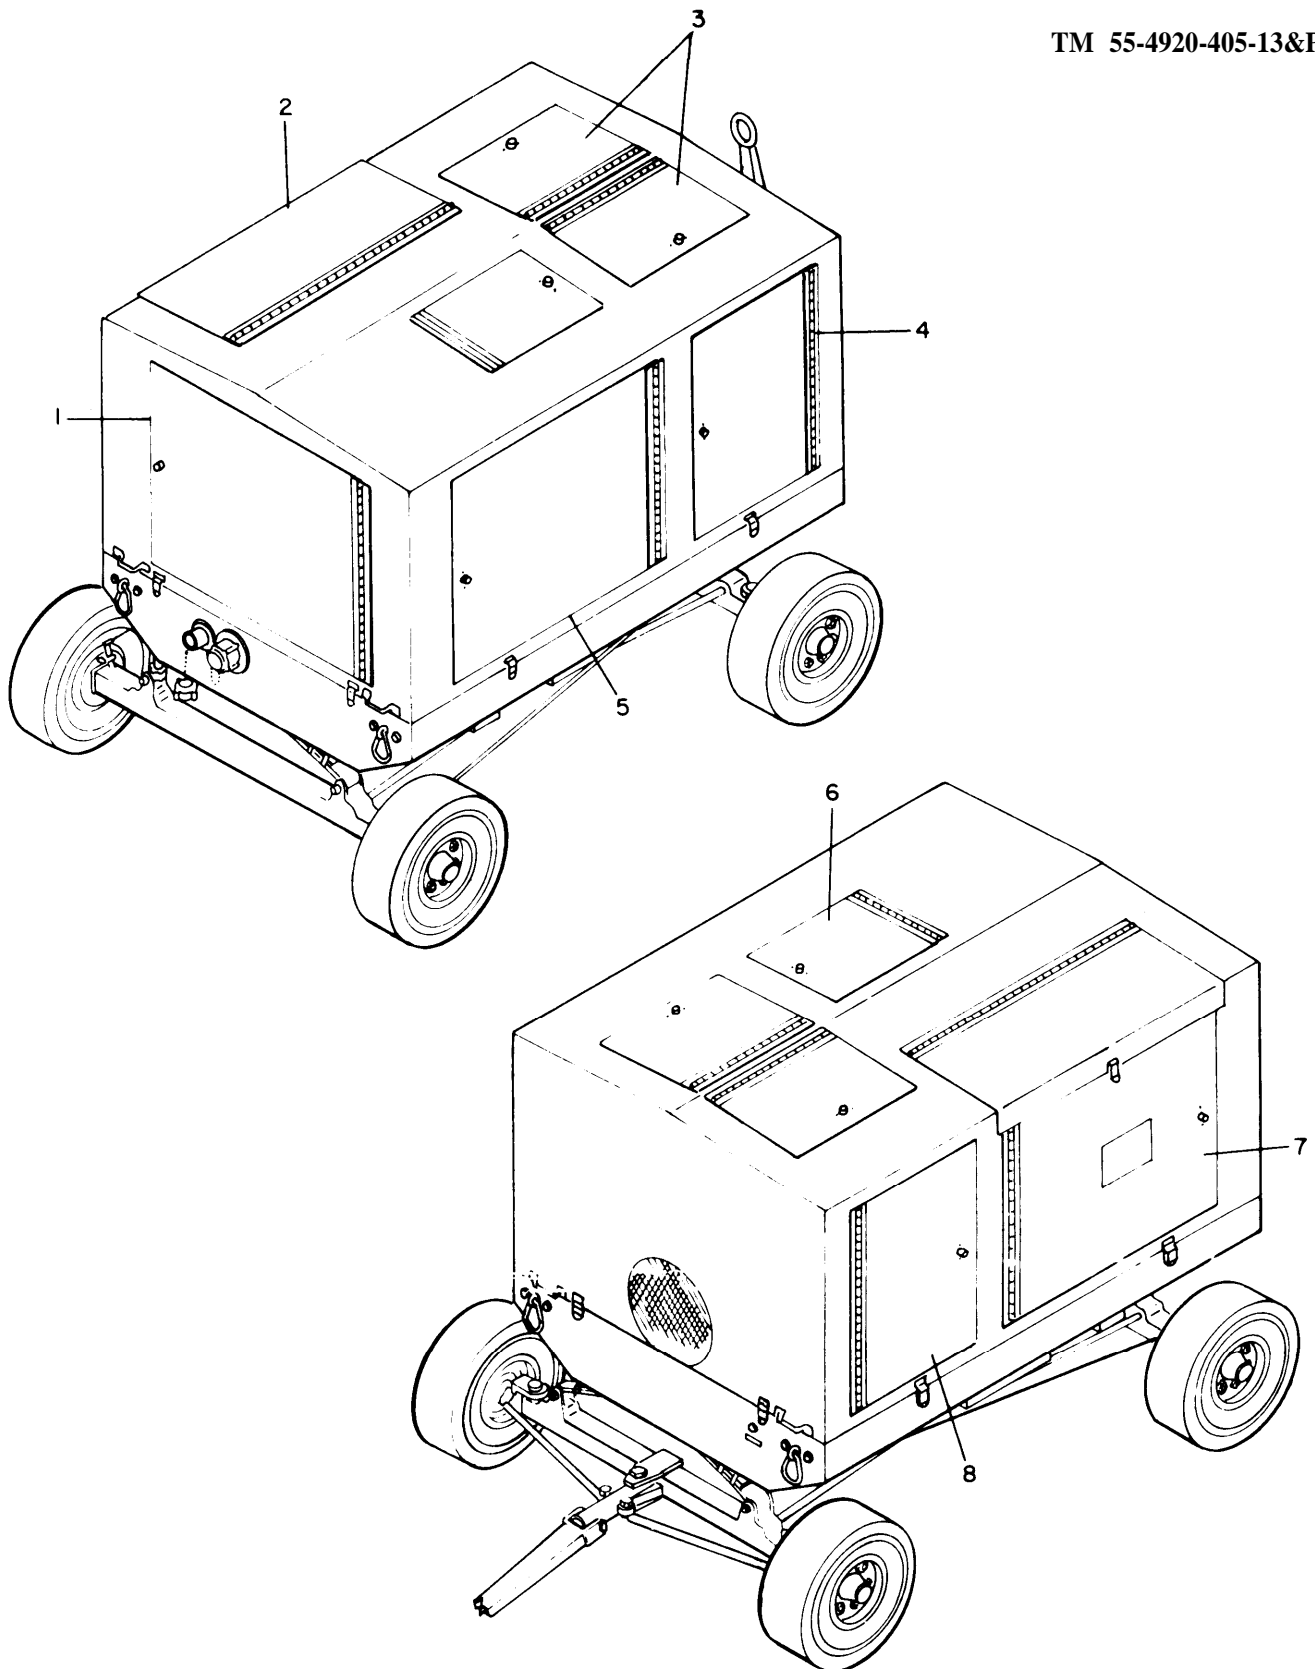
Hydraulic Test Stand, Type D-5C, Major Assemblies
